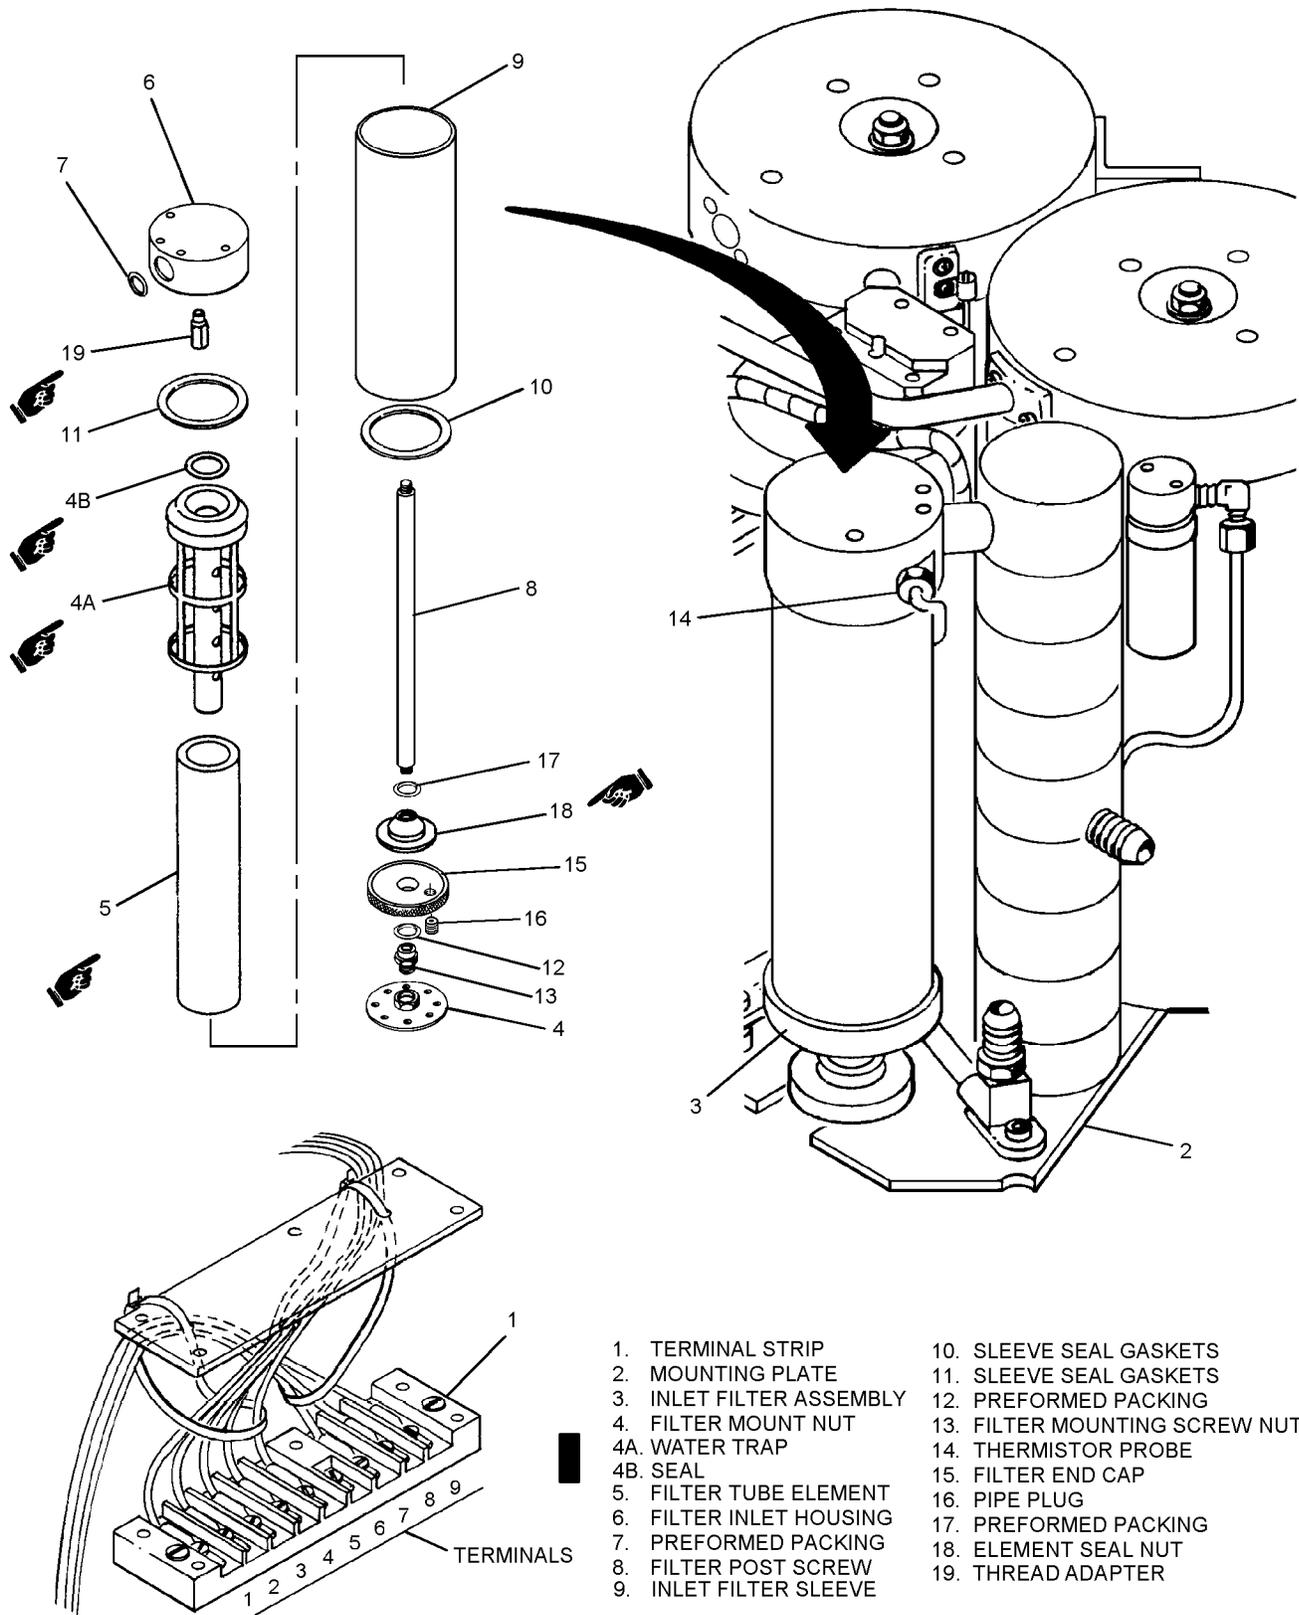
Inlet Filter Assembly Removal/Assembly
